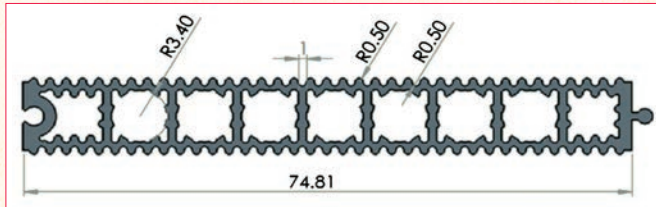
Cross section view of multi-wall sheet (Rane and Chavan, 2014)
